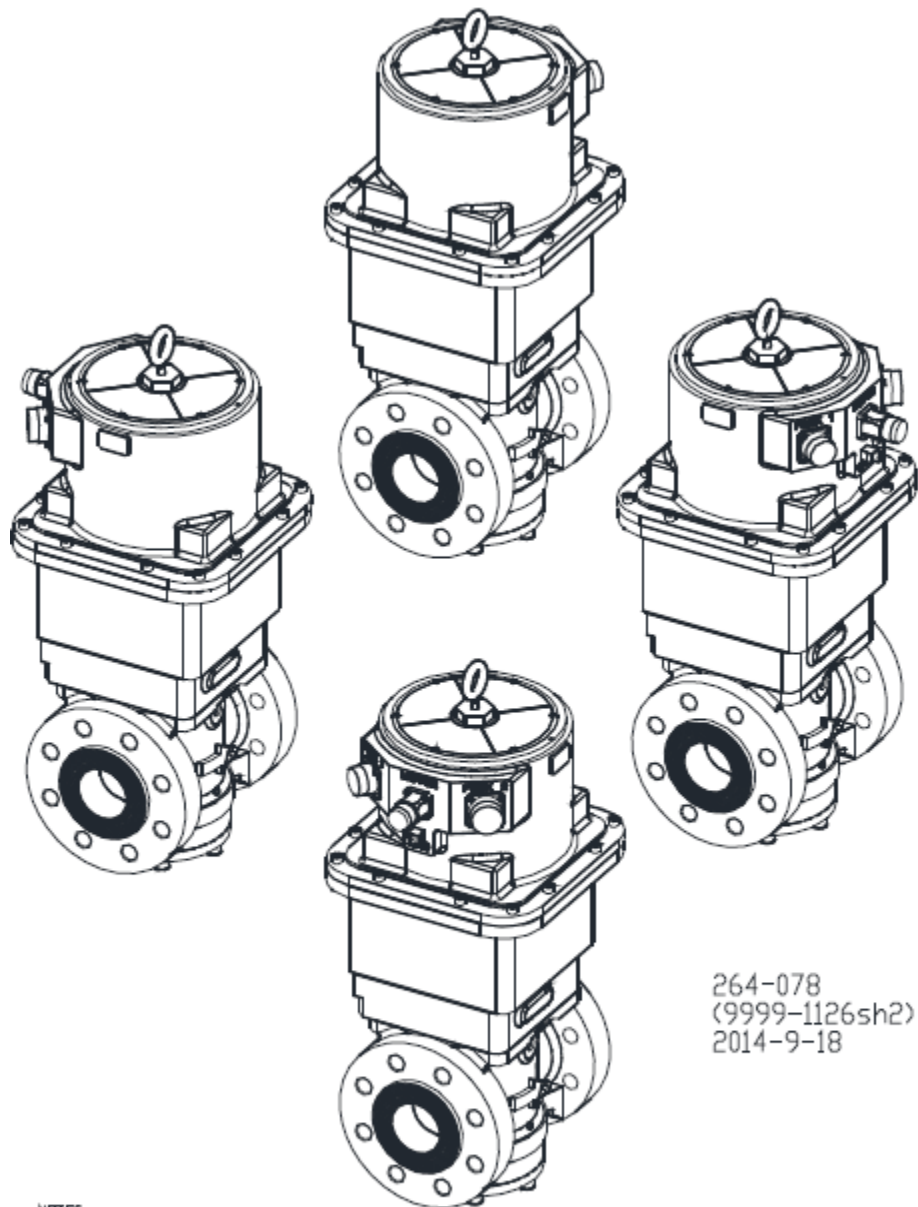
GS16DR Valve Outline Drawing; High Pressure 900 psig Valve (dimensions shown are in inches)
